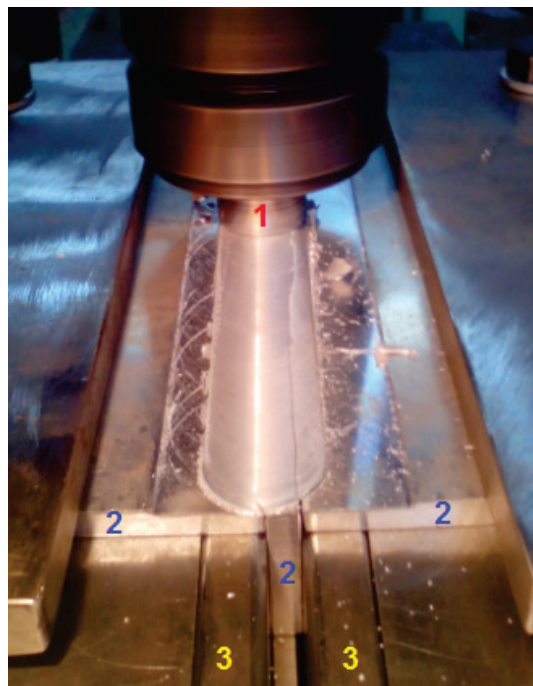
Photo of FSW of T joint and clamping tool, positioning of 1- tool, 2-working plates and 3-backing plates
